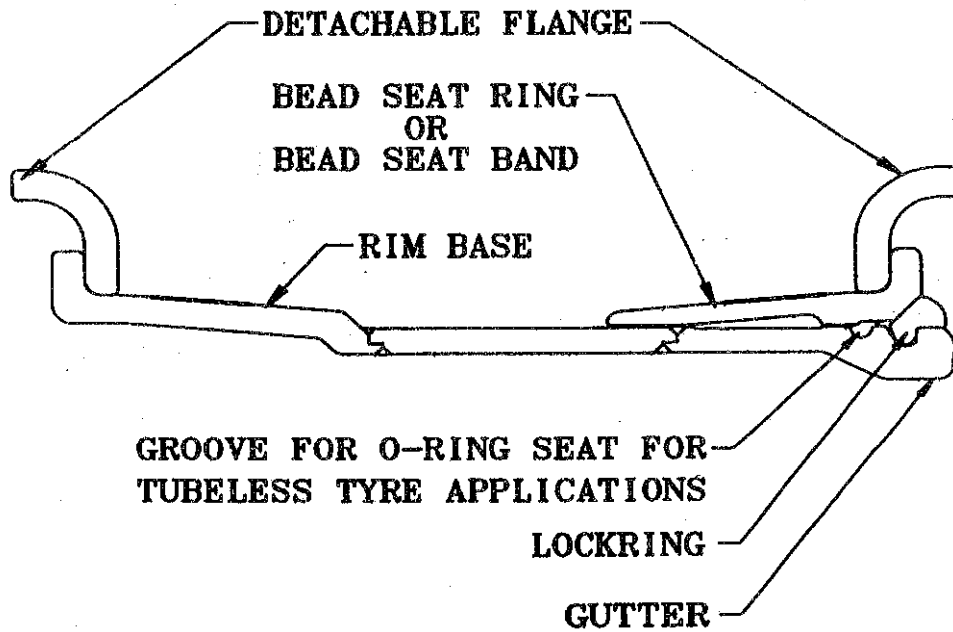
FIVE-PIECE RIM NOMENCLATURE
